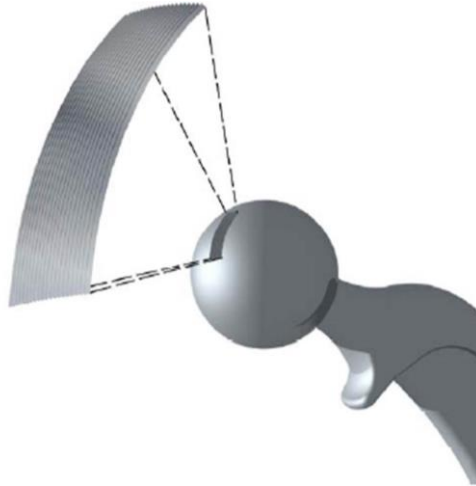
Conceptual schematic for ruled-scratch femoral head damage, produced by CNC machining.
